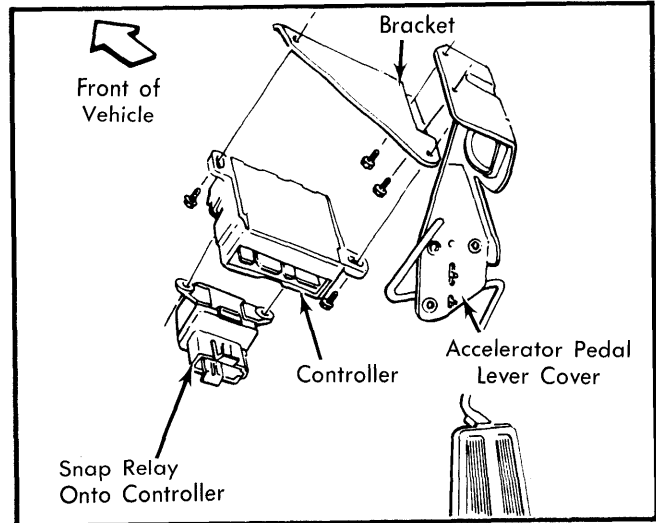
Cadillac Eldorado & Seville & Oldsmobile Toronado Anti-Theft Controller Location
